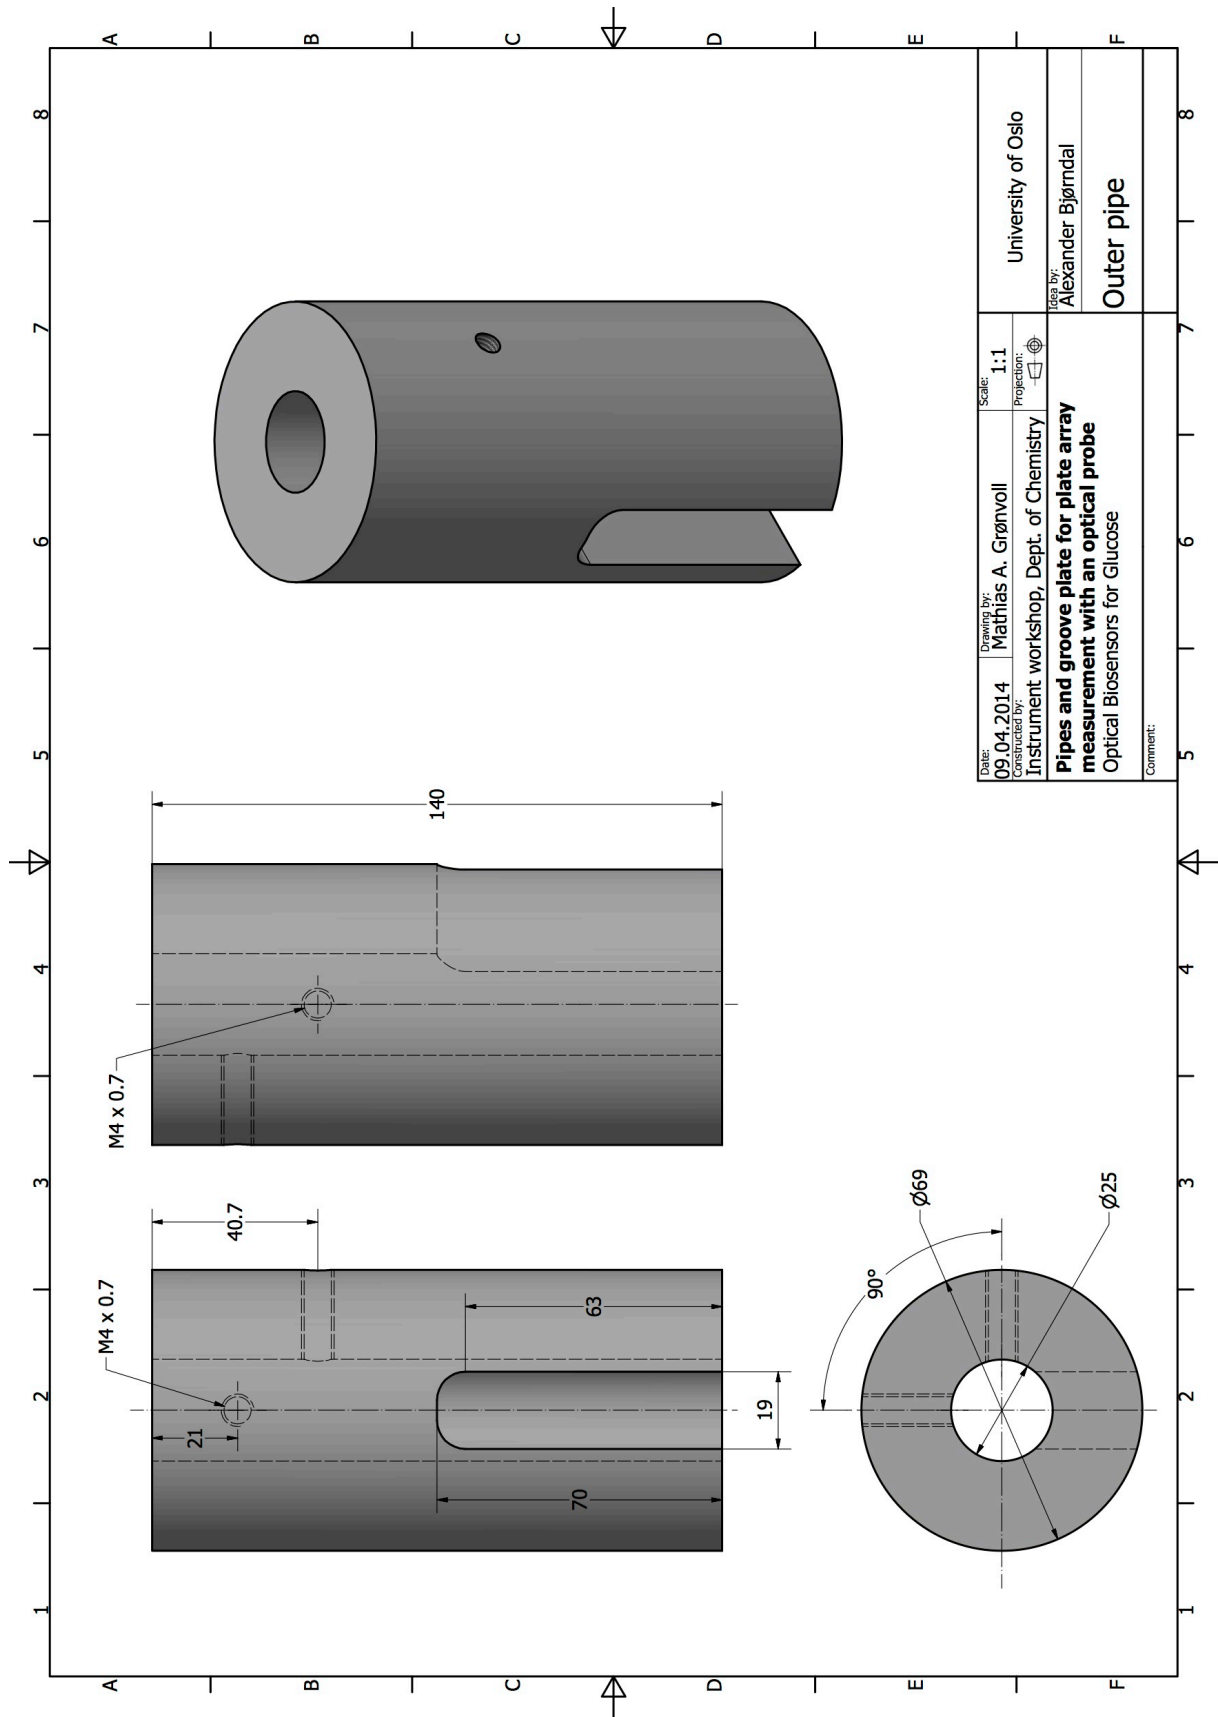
Outer pipe used in the setup for plate array measurement with groove plate and pipes.
